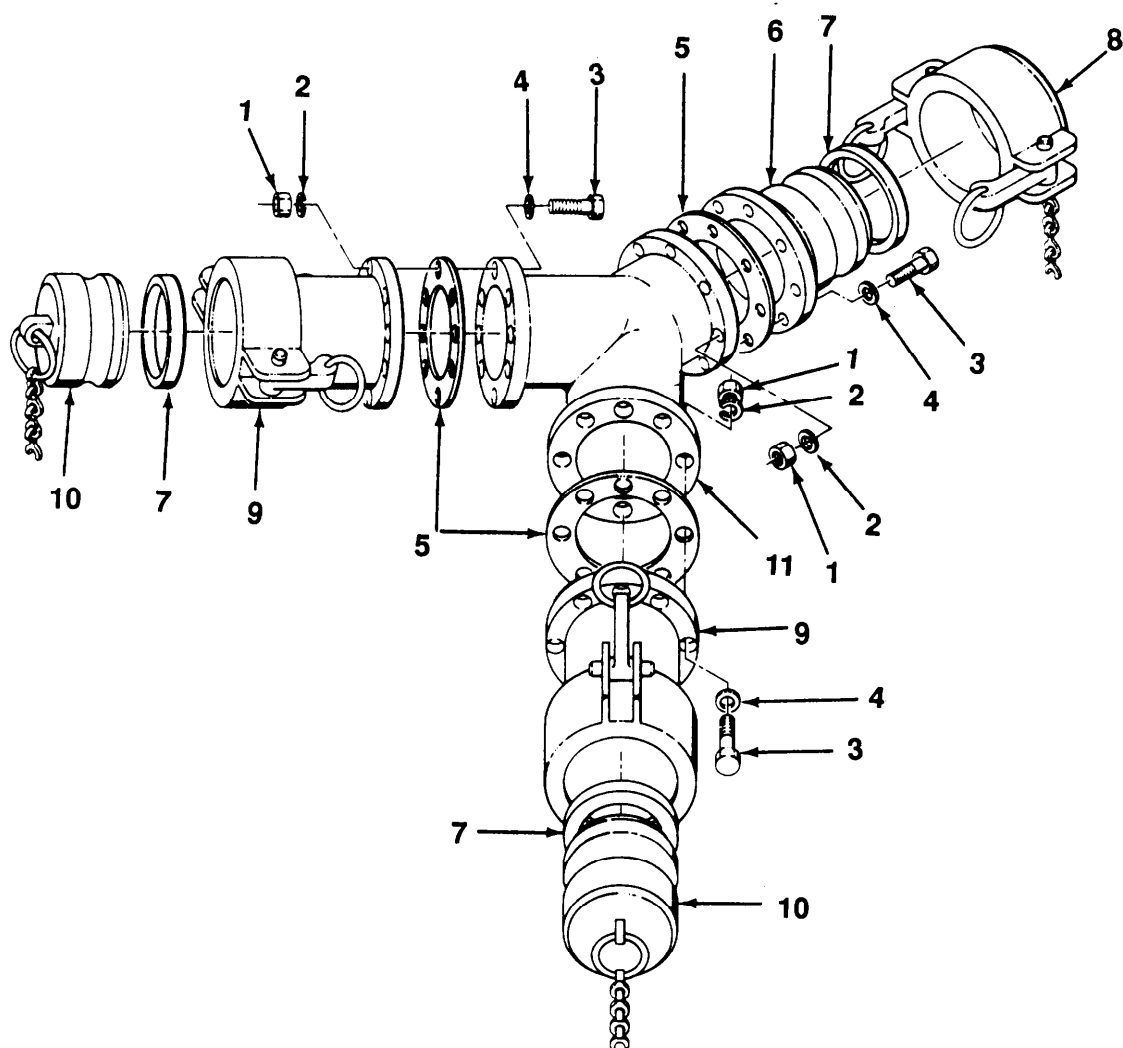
Wye Assembly, 4 In., w/2 Female, 1 Male
